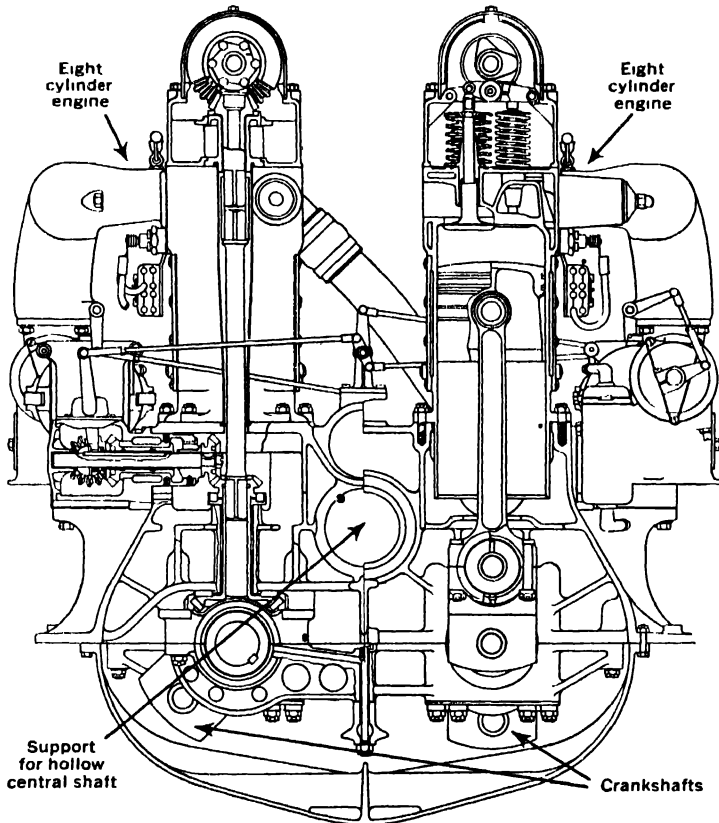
The Transverse Section of the Bugatti Engine Showing Arrangement of Two Banks of Vertical Cylinders at Each Side of a Centrally Disposed Propeller Driveshaft, a Very Unusual Arrangement.
